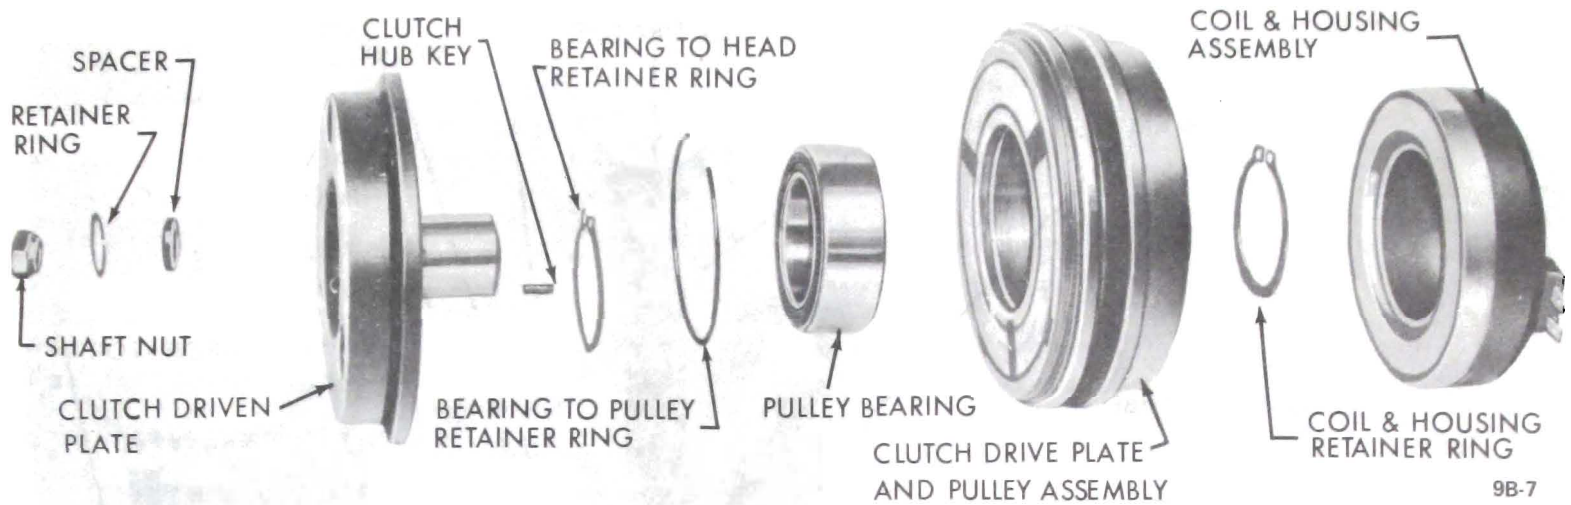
B-1 Magnetic Clutch and Pulley Assembly
